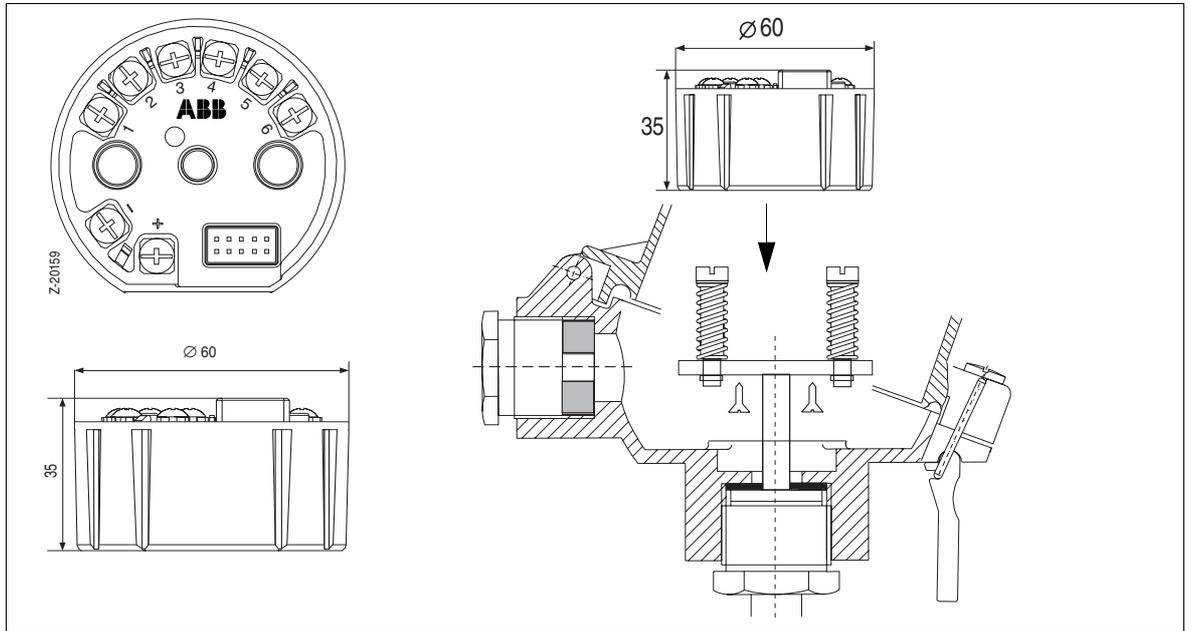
Mounting the transmitter in the sensor head (all dimensions in mm)
